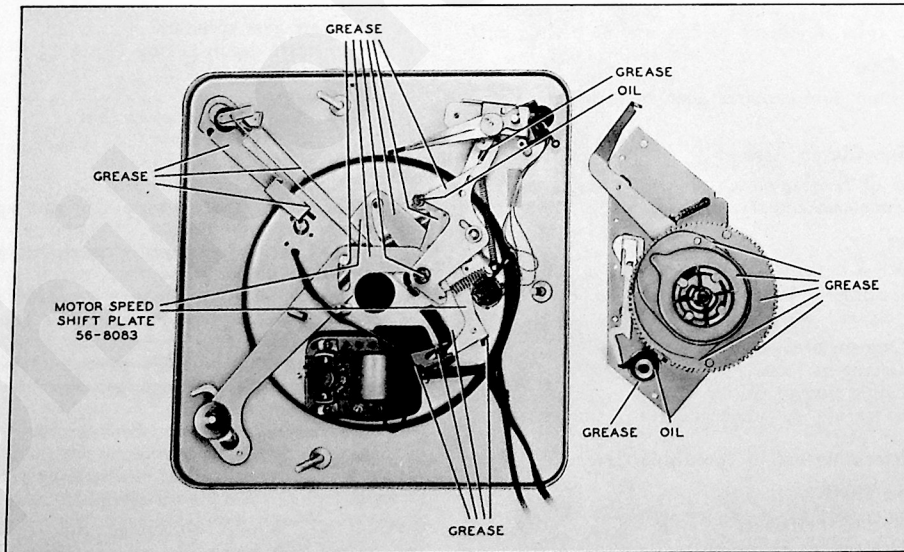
Bottom View, Bridge Removed, Showing Lubrication Points
